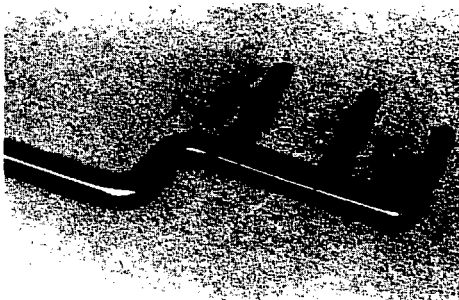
The indicator rod with its milled groove for fixation of the plastic rings.
